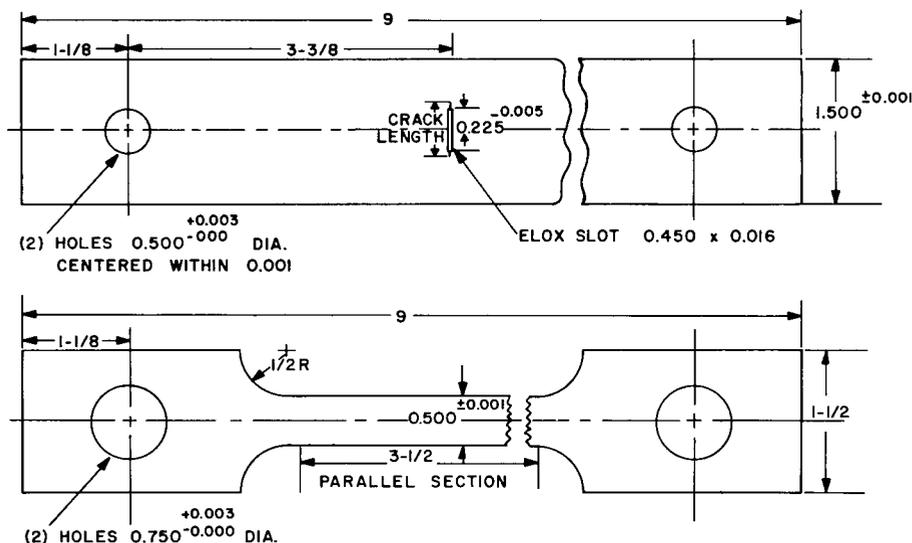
(a) Crack propagation and (b) tensile test specimens
